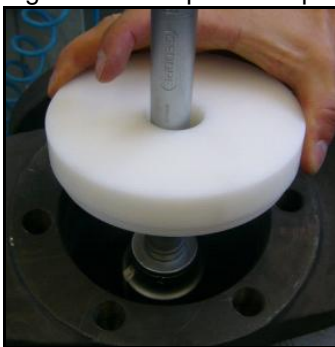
Nozzle assembly tool Figure 17: Nozzle assembly tool
